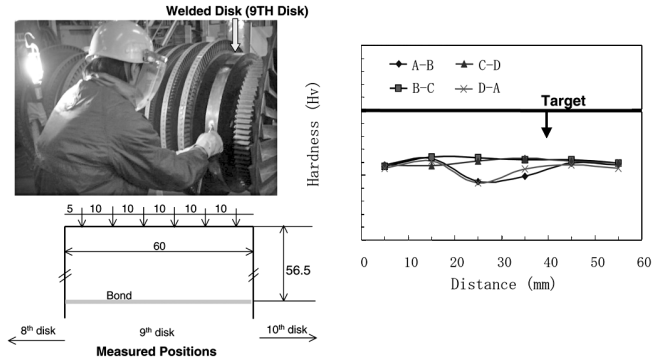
Hardness of the Welded Metal for the Actual Rotor.
